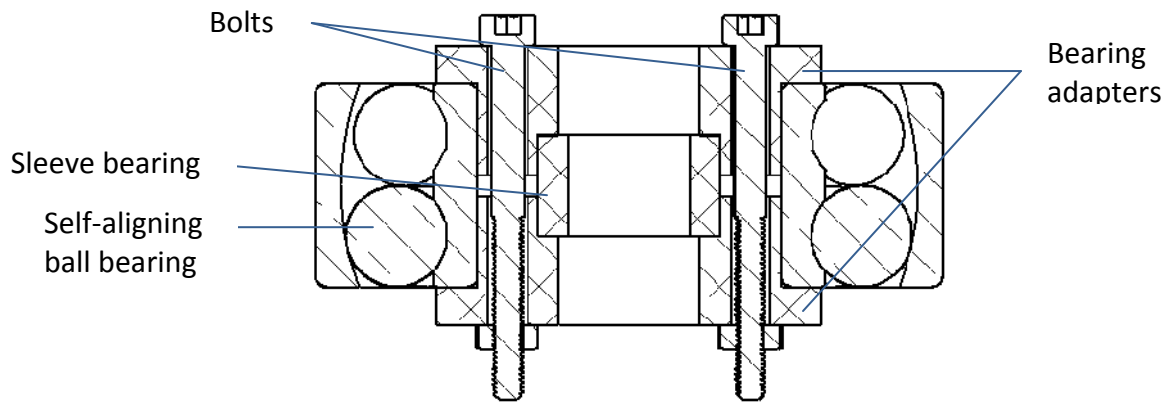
Bearing adapters clamp sleeve bearing inside self-aligning ball bearing
